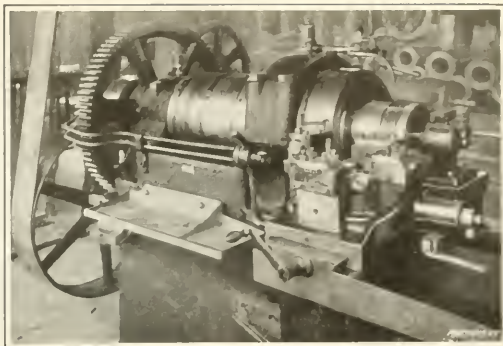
Machine for turning, under-cutting and waving Band Seat, and facing Shell to Required Length
